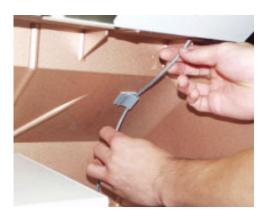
Feed Fan Power Cable through cable clip in ATM upper enclosure.
